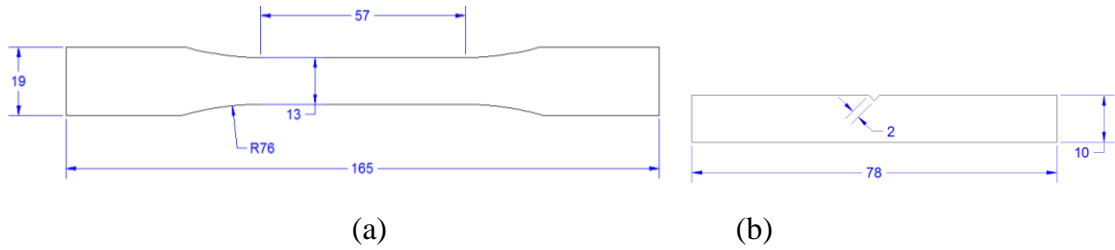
Specimen of (a) tensile test, (b) of Charpy Impact test, all dim. in mm.
